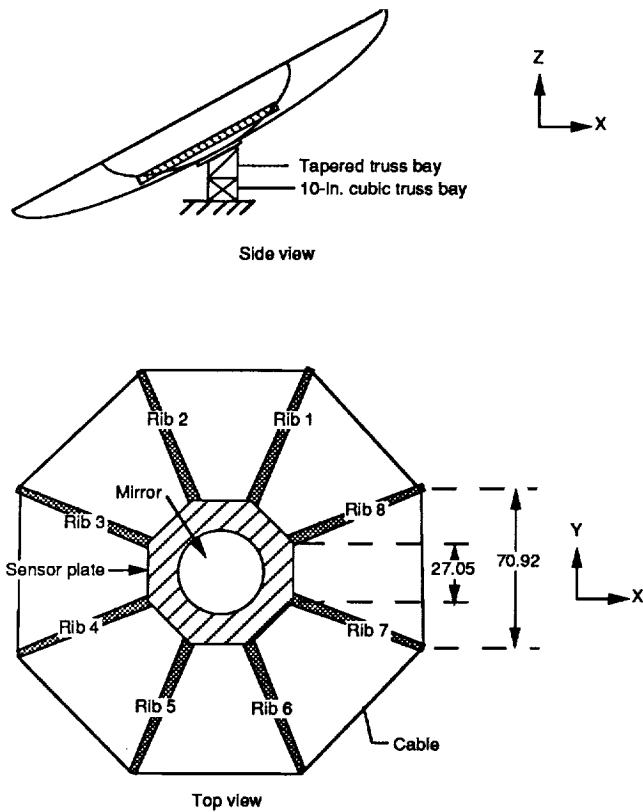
Side and top views of reflector in inclined position. All linear dimensions are in inches.
